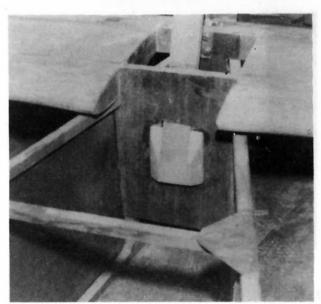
Plywood web attaching forward spar and anchoring vertical fin front spar.
